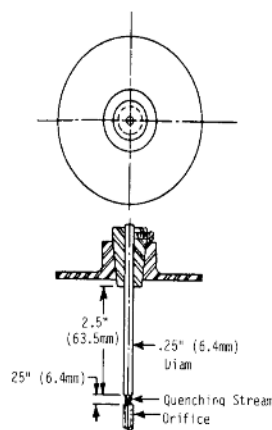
Support for Smaller-Size Specimens, Showing 0.25-in. (6.4-mm) Specimen in Position
